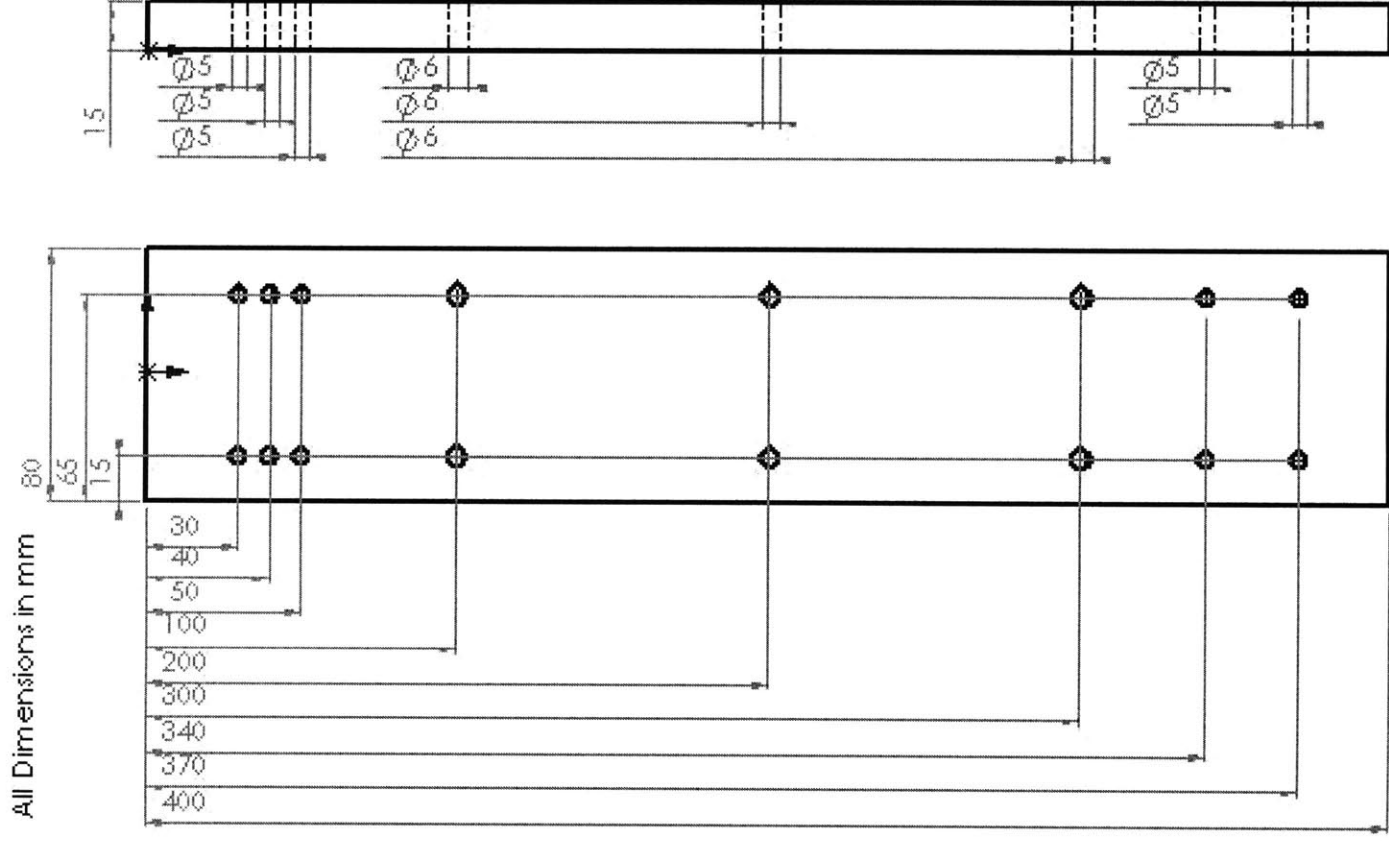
Dimensions of the baseplate of the magnet-across-coils system.
